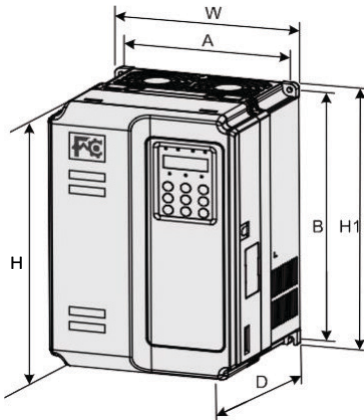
Mounting dimension diagram of the Q1200 (7.5-15kW, plastic housing)
